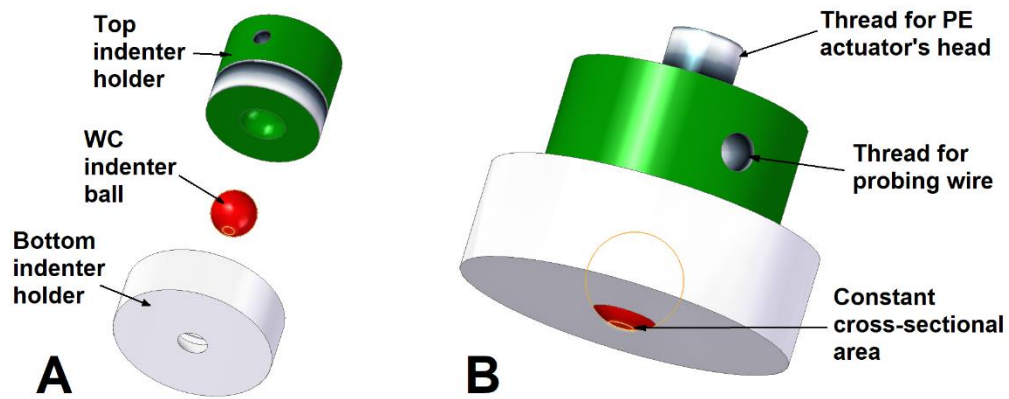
Indenter and its holder. With: A – exploded view with the corresponding part names and B – assembled version with key element details.
